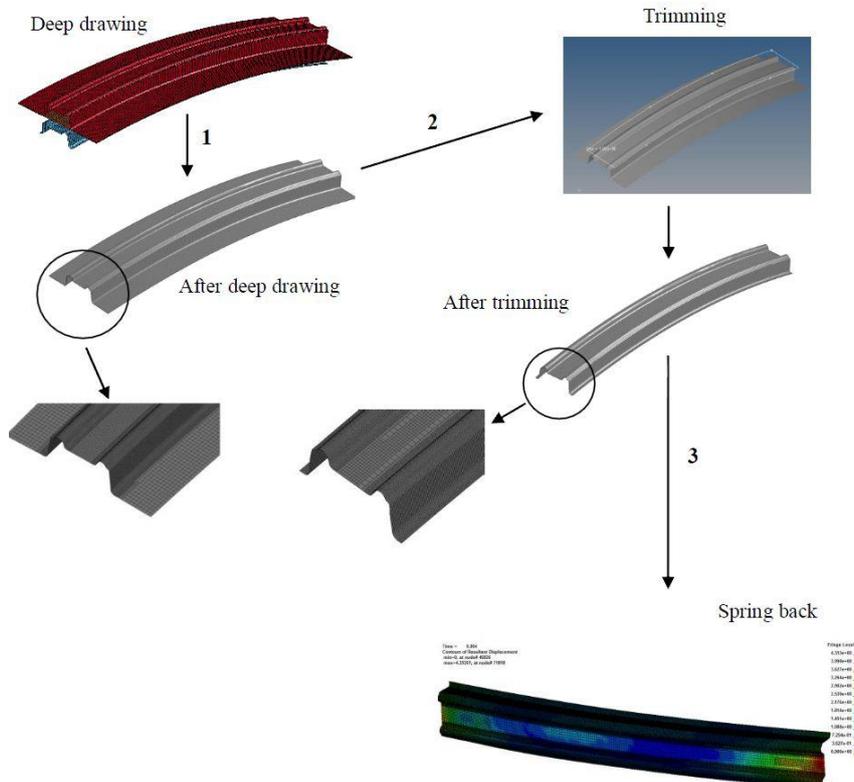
Deep drawing, trimming and spring back analyses of bumper beam
